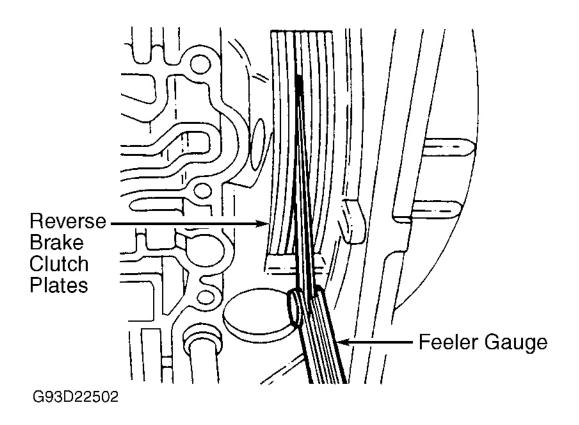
Checking Reverse Brake Clutch Clearance Courtesy of VOLKSWAGEN UNITED STATES, INC.
